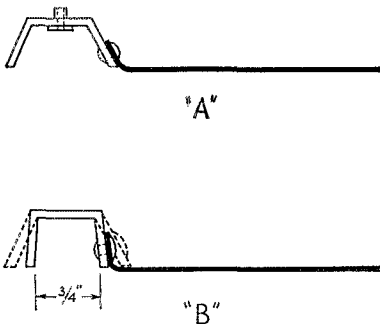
TV strap-type stand-off insulators "A", are modified by removing the threaded insert and by bending the assembly to the dimensions shown in "B".
